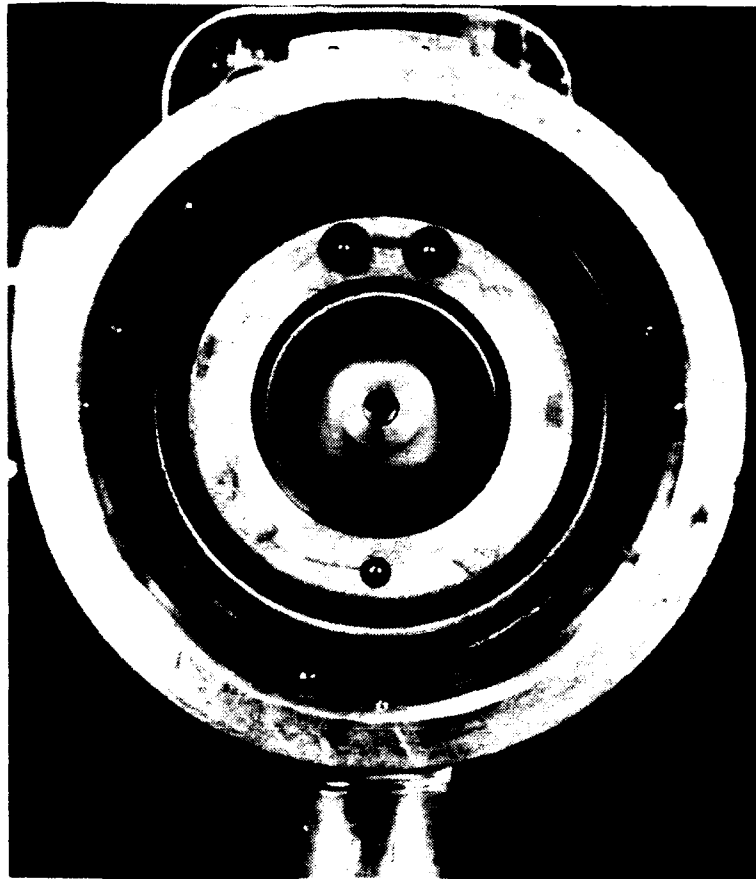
End View of Aeroquip Nozzle Showing Broken and Bent Pins
